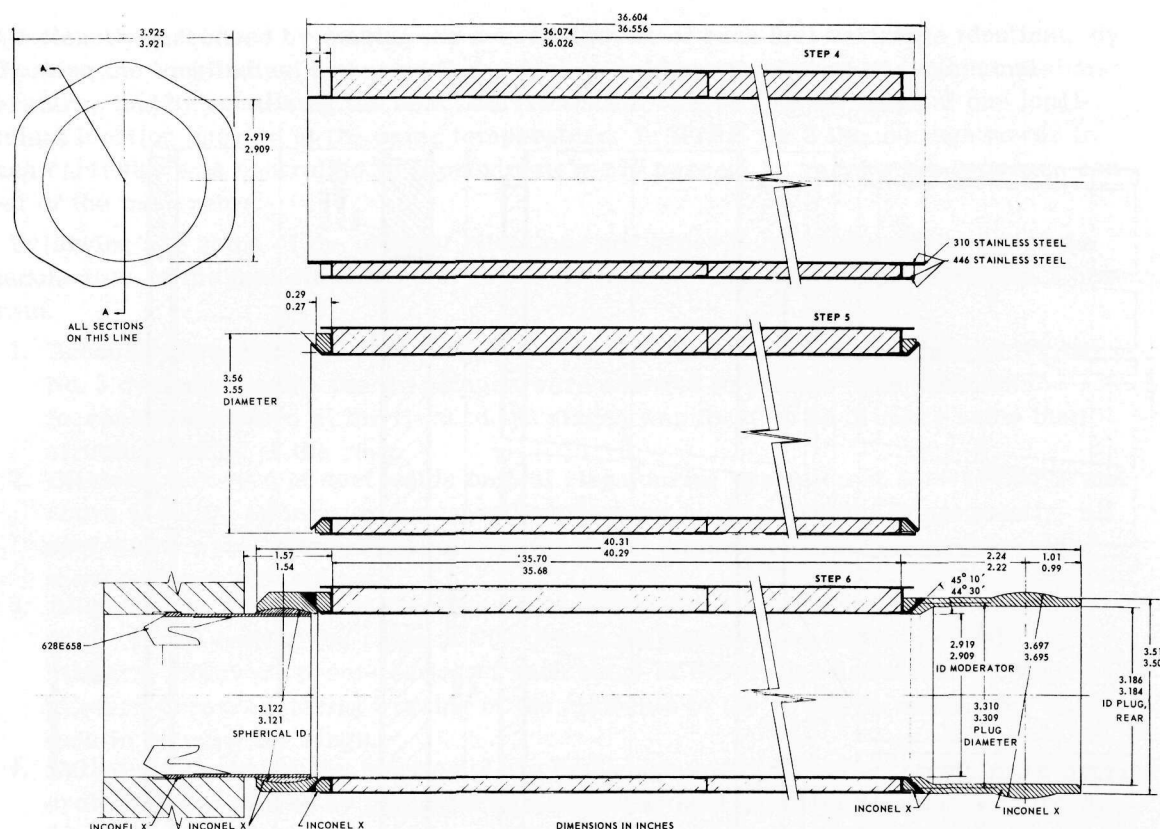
Final three steps in moderator assembly procedure (SK628E660)
